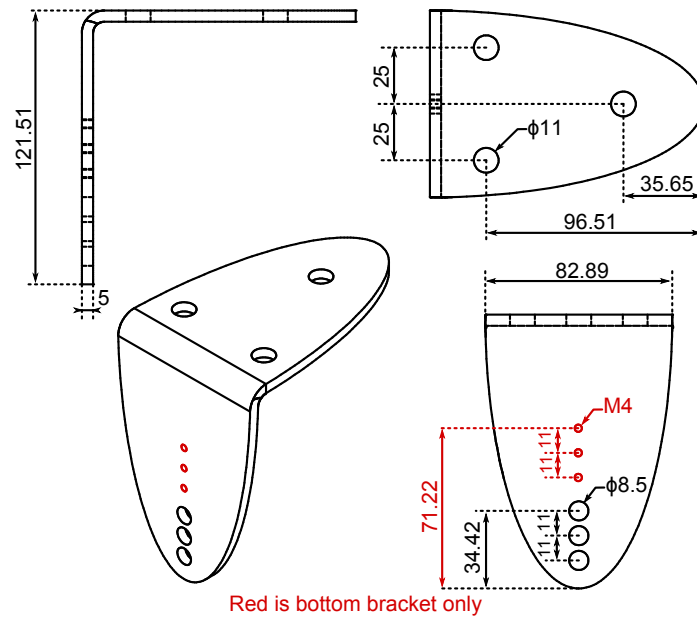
Fixing brackets for wall mounting of StepArray columns.
